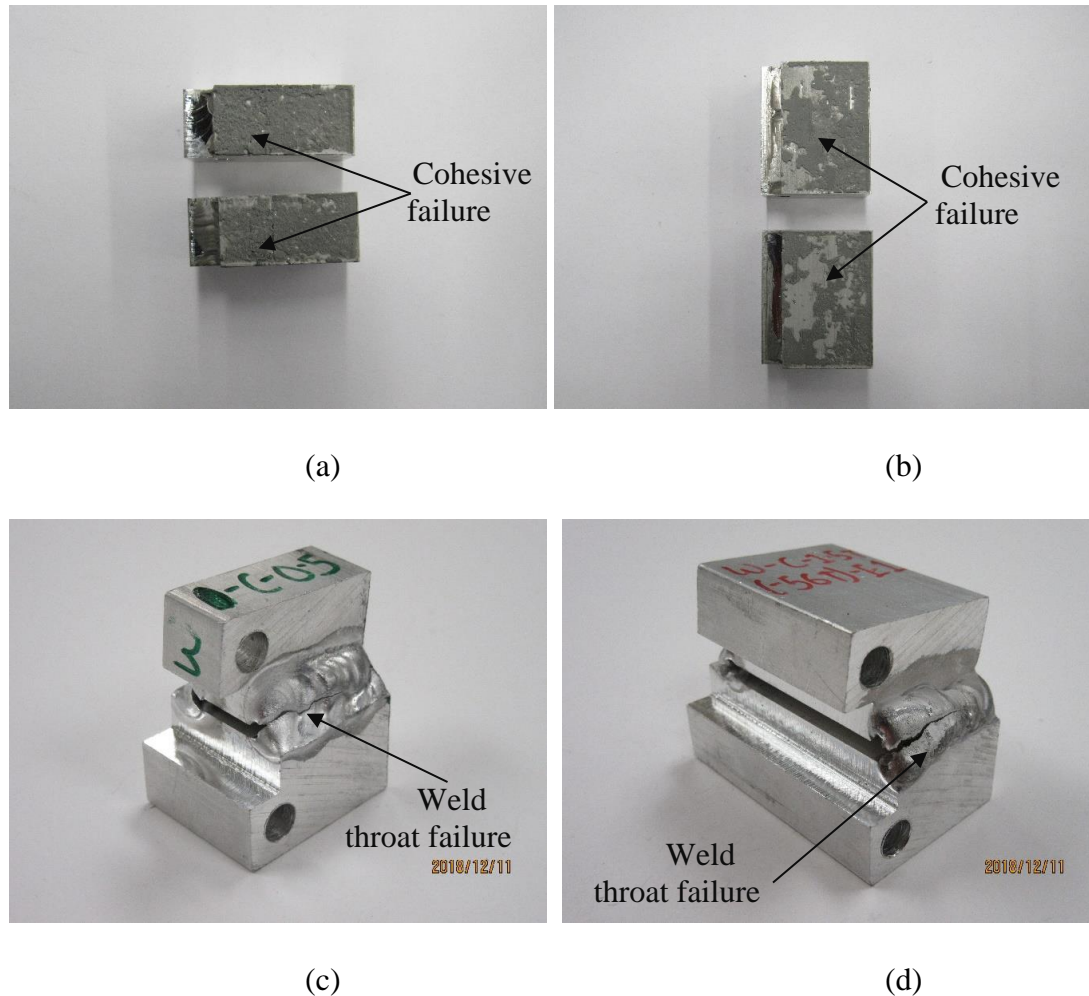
Representative failure modes of cleavage specimens (a) adhesive with 13 mm width, (b) adhesive with 38 mm width, (c) welded with 13 mm width, and (d) welded with 38 mm width
